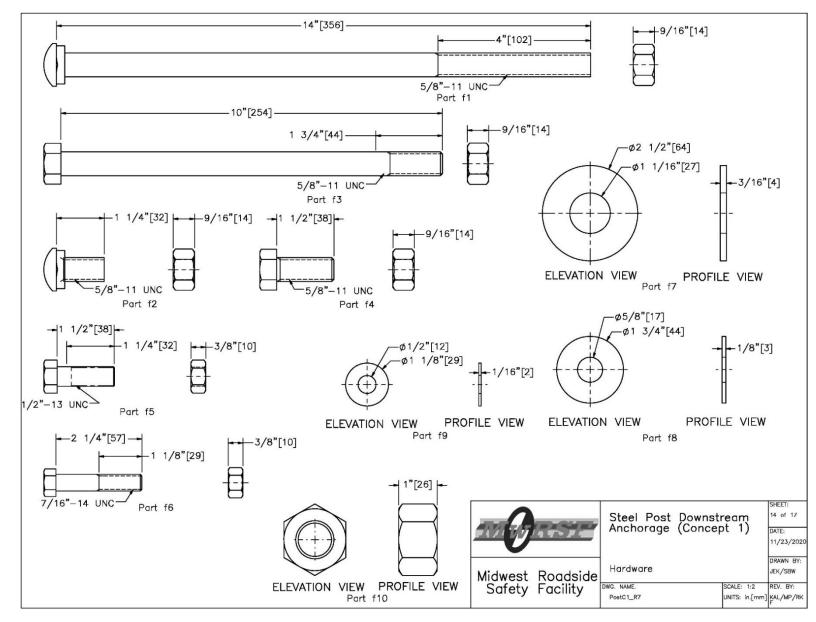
Bolt and Washer Details, Test No. SPDA-1
